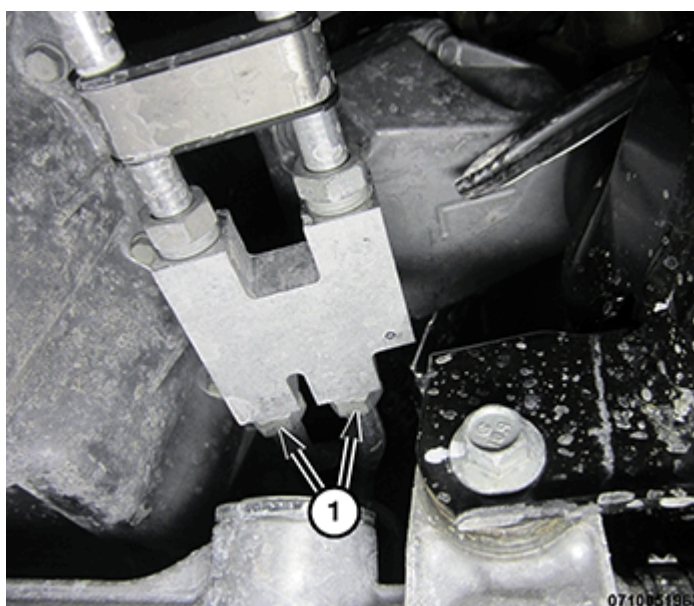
Front Transmission Cooler Lines From The Thermal Bypass Valve Block
